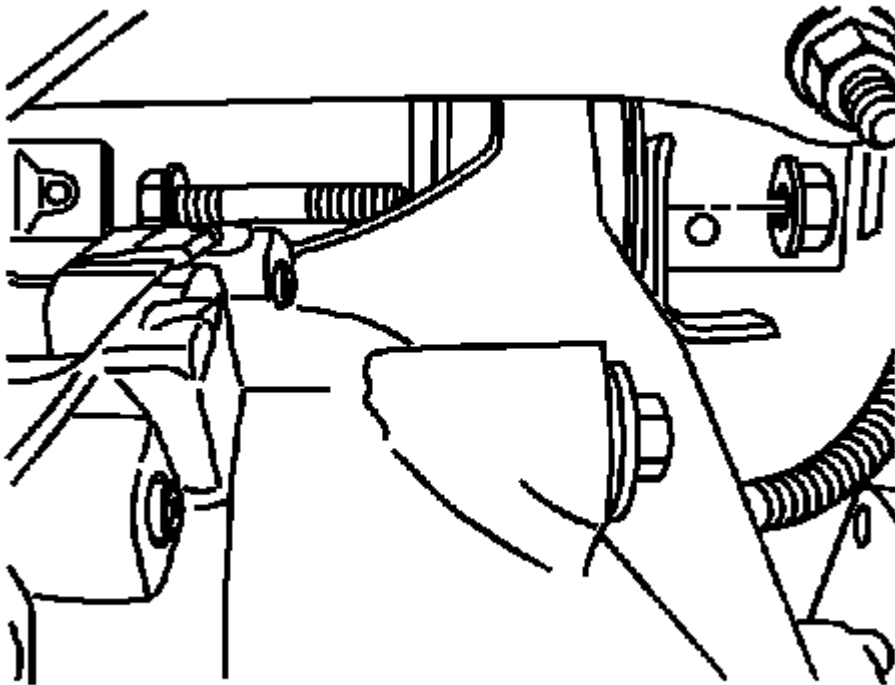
View Of Differential Carrier Upper Mounting Bolt
